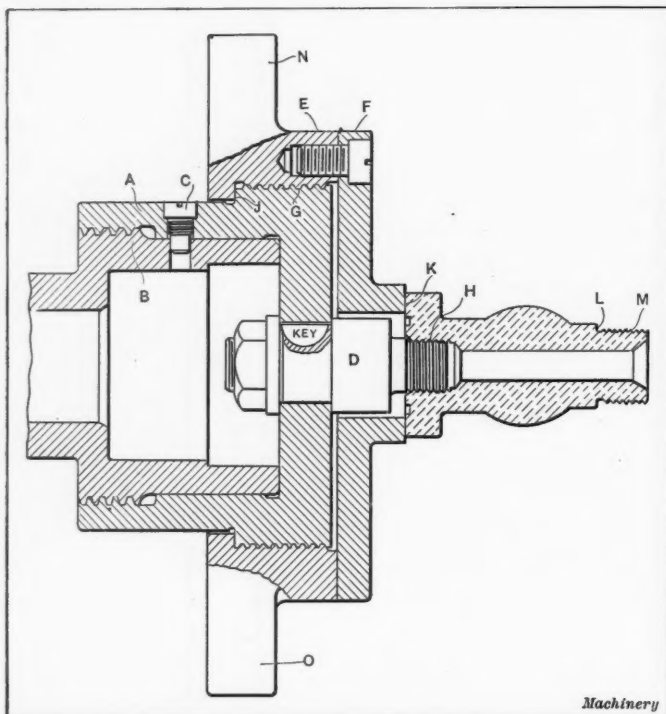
Arbor for machining Valve Body shown in Fig. 1
